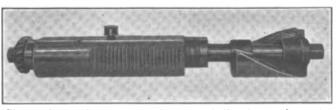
Cut'er-slide, cutter and cutter-spindle of gear shaper for helical gear work
